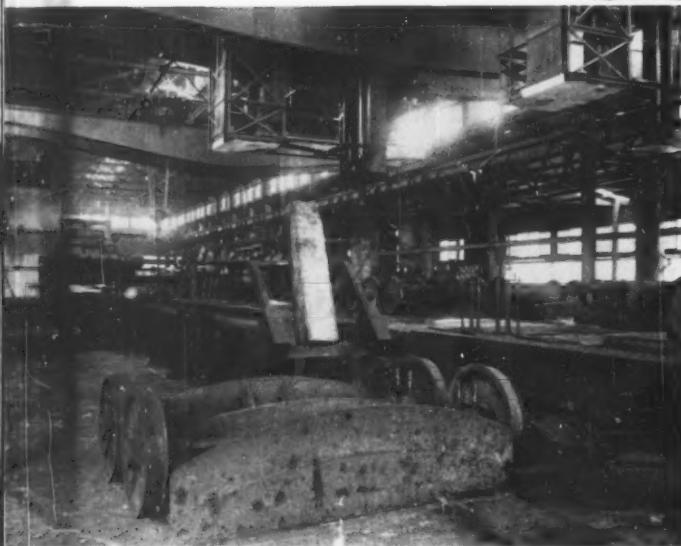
Gearing drives ingots on the roll tables of a slabbing mill.
